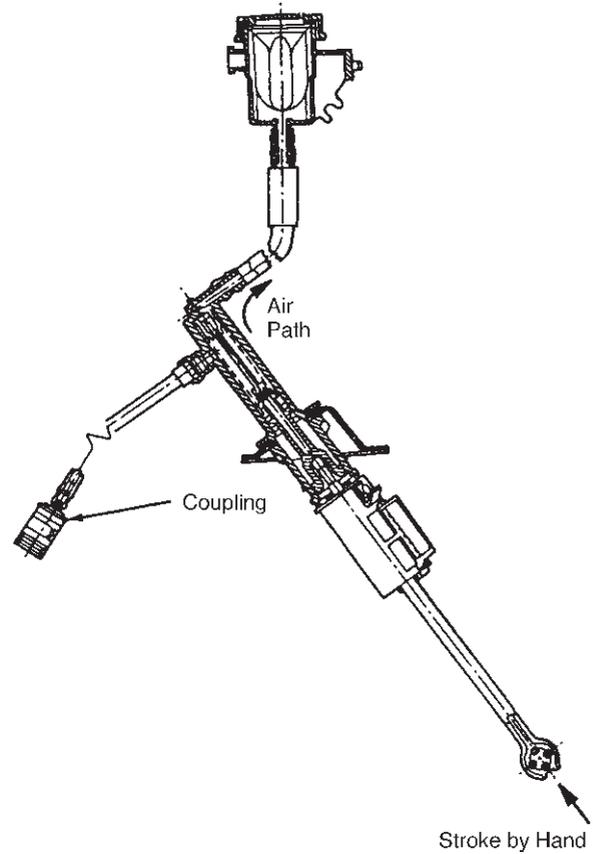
This clutch master cylinder is mounted with the push-rod end above the inlet and outlet, which makes bleeding difficult. It can be bench bled by stroking the push rod by hand before mounting the master cylinder. (Courtesy of Ford Motor Company)
